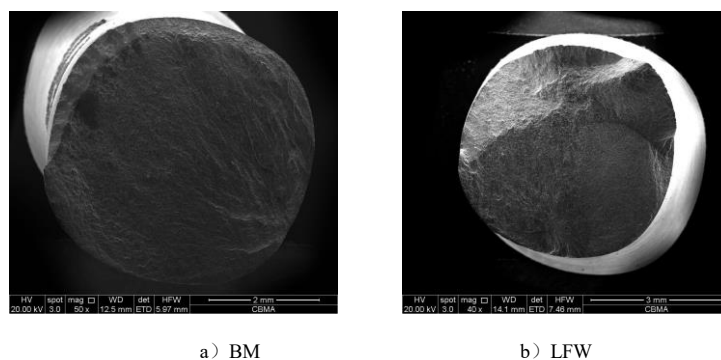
Fracture morphologies of linear friction welded TA15 alloy (LFW) and base metal (BM) in high-cycle fatigue tests
